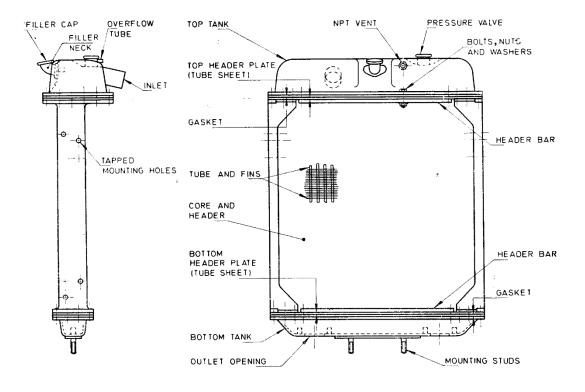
BOLTED TYPE RADIATOR, DRAWN TANKS
